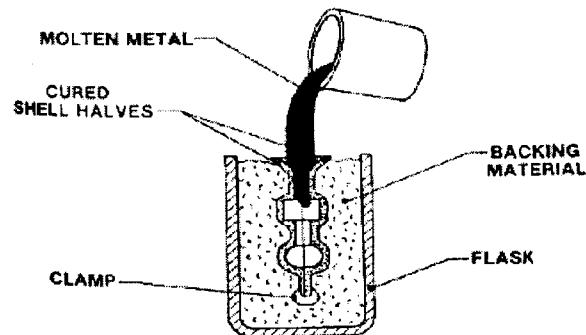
Making the shell-mold [Source: Kalpakjian & Schmid] Figure 6. Shell mold casting
